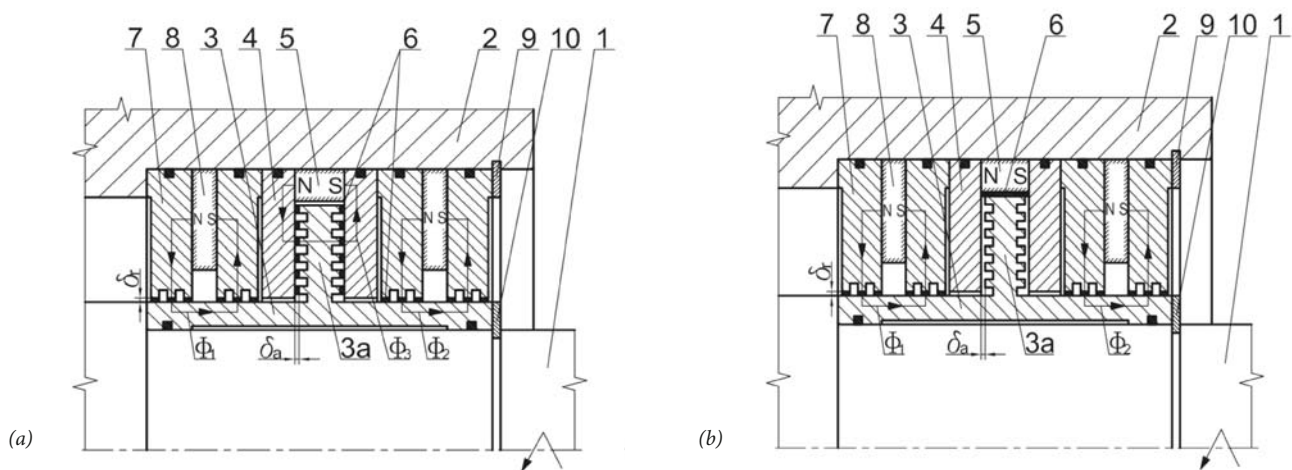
Hybrid seal with magnetic fluid for high-speed shaft (a) position of magnetic fluid at low rotating speed, (b) position of magnetic fluid at high rotating speed, 1 – shaft, 2 – housing, 3 – flanged sleeve, 3a – flange with sealing projections, 4 – rectangular cross-section pole piece, 5, 8 – permanent magnets, 6 – magnetic fluid, 7 – multi-edged pole piece, 9, 10 – snap rings, δ_a – axial sealing gap, δ_r – radial sealing gap, Φ_1, Φ_2, Φ_3 – closed magnetic circuits
